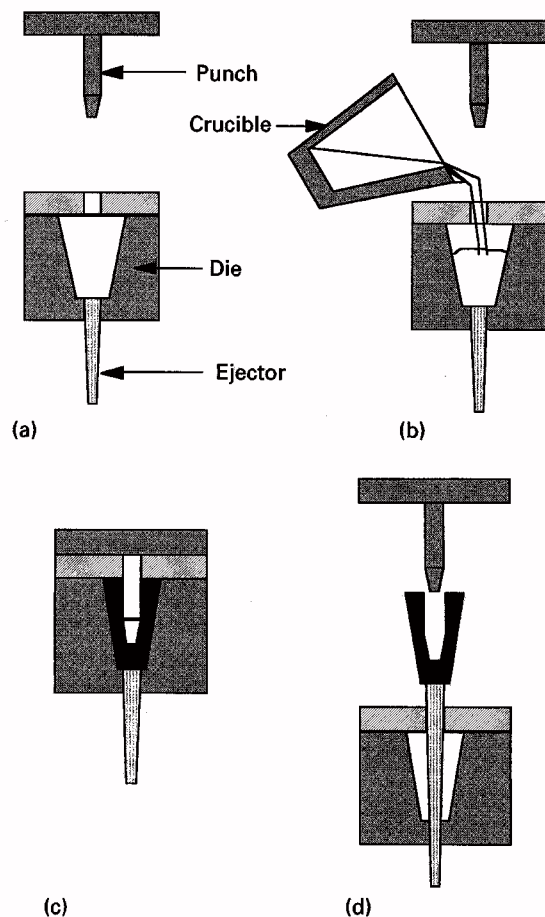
Schematic diagram of the direct squeeze-casting process. (a) Step 1, preheat, lubricating tooling. (b) Step 2, transfer melt into die cavity. (c) Step 3, solidify melt under pressure. (d) Step 4, eject casting.
